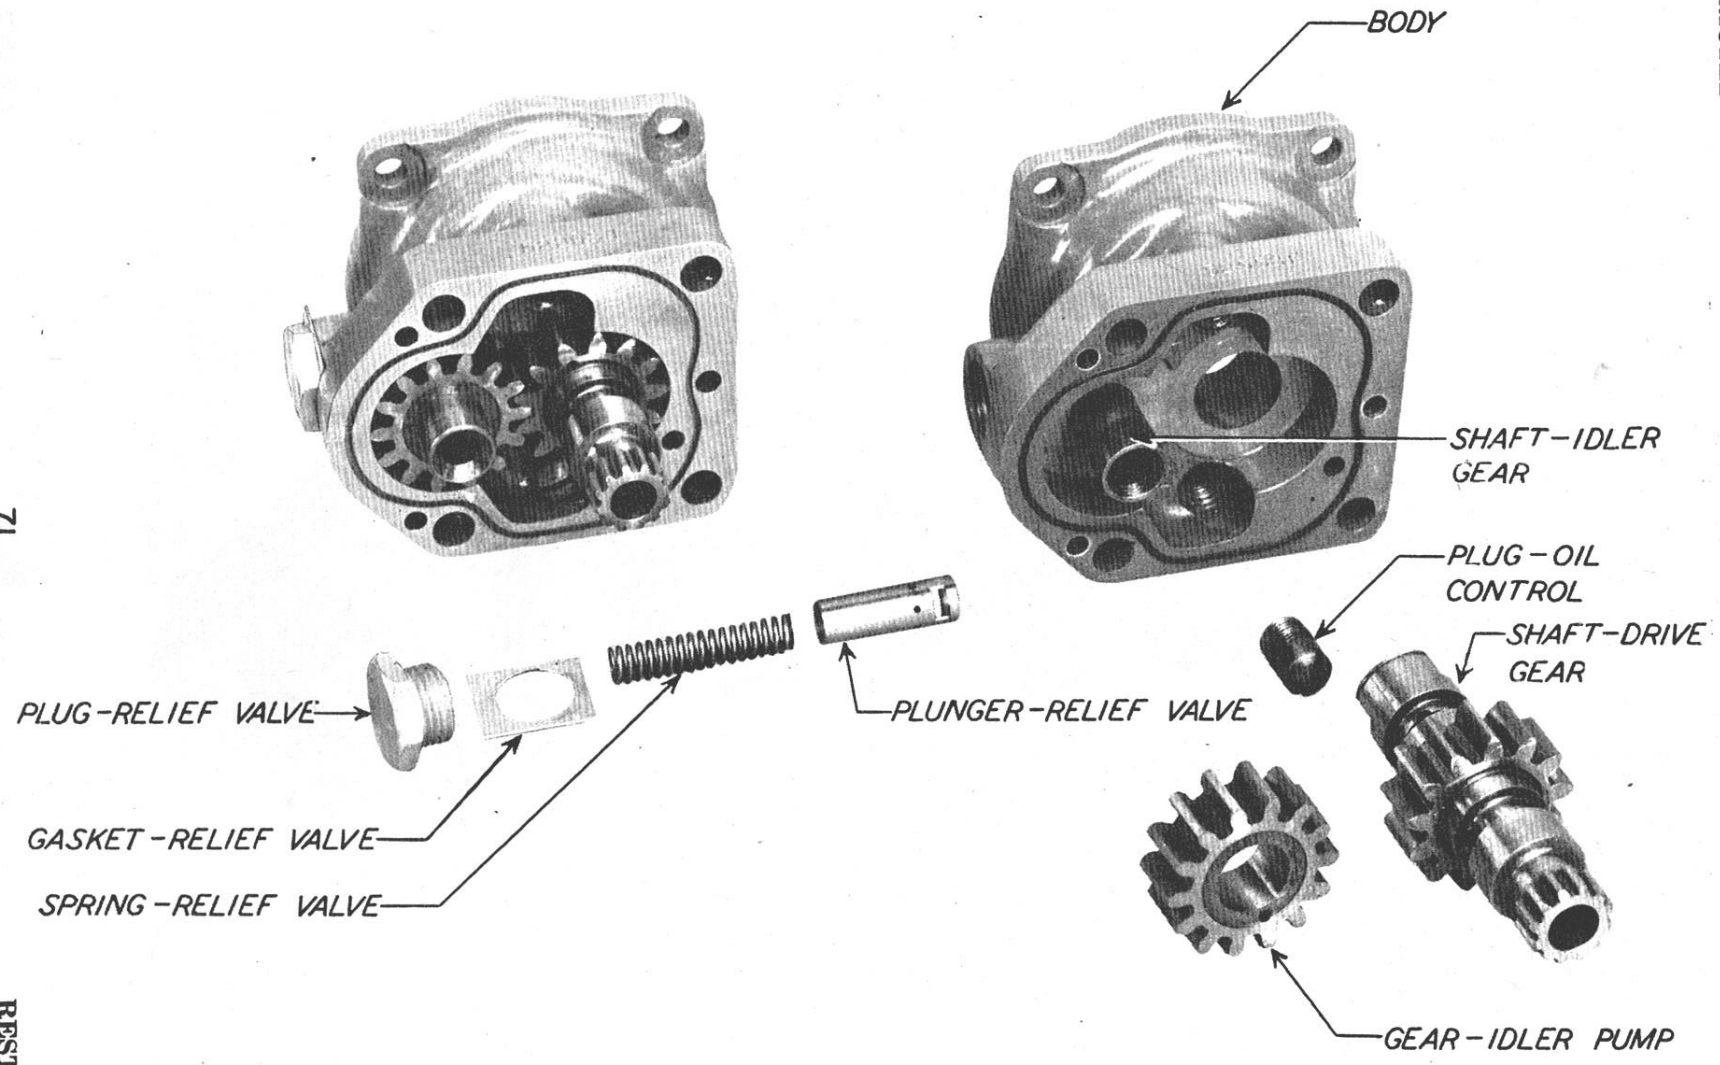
BODY & DRIVE GEAR ASSEMBLY
